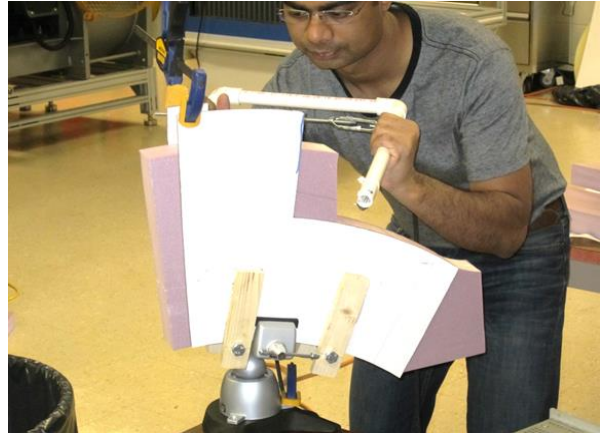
Jig for cutting insulation for the shearer scroll.
